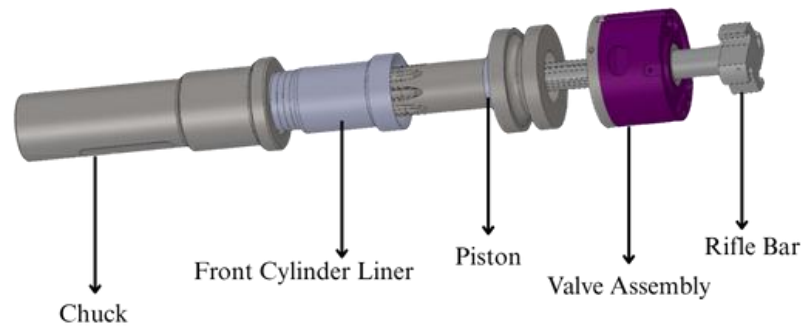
Exploded view of the Piston-Rifle bar assembly, along with the valve assembly.
